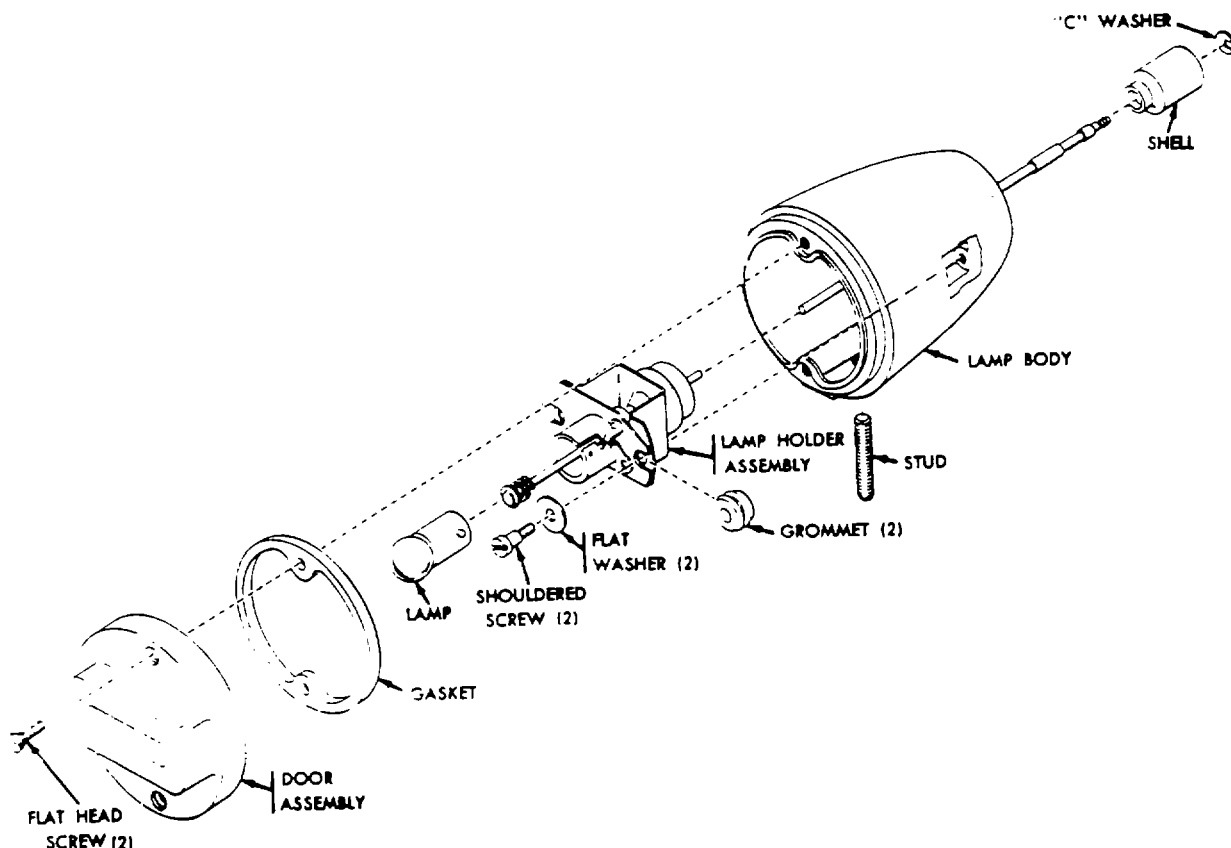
Disassembly of Blackout Marker Lamp Assembly.
